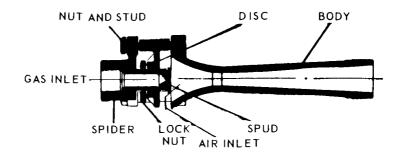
Cross-sectional view of open-type inspirational premix burner.
